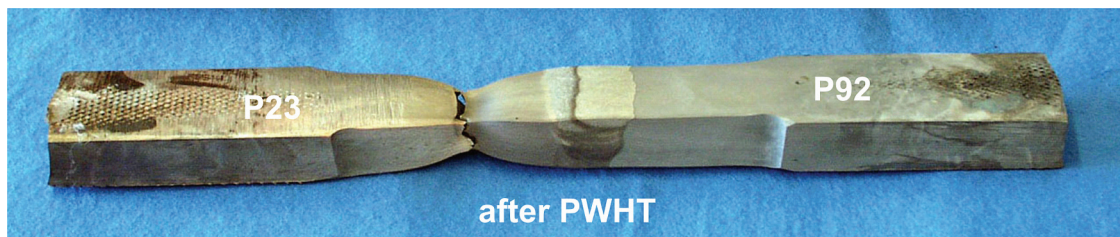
Tensile test specimen of the weld P23 / P92, filler metal matching P23; tested at RT
